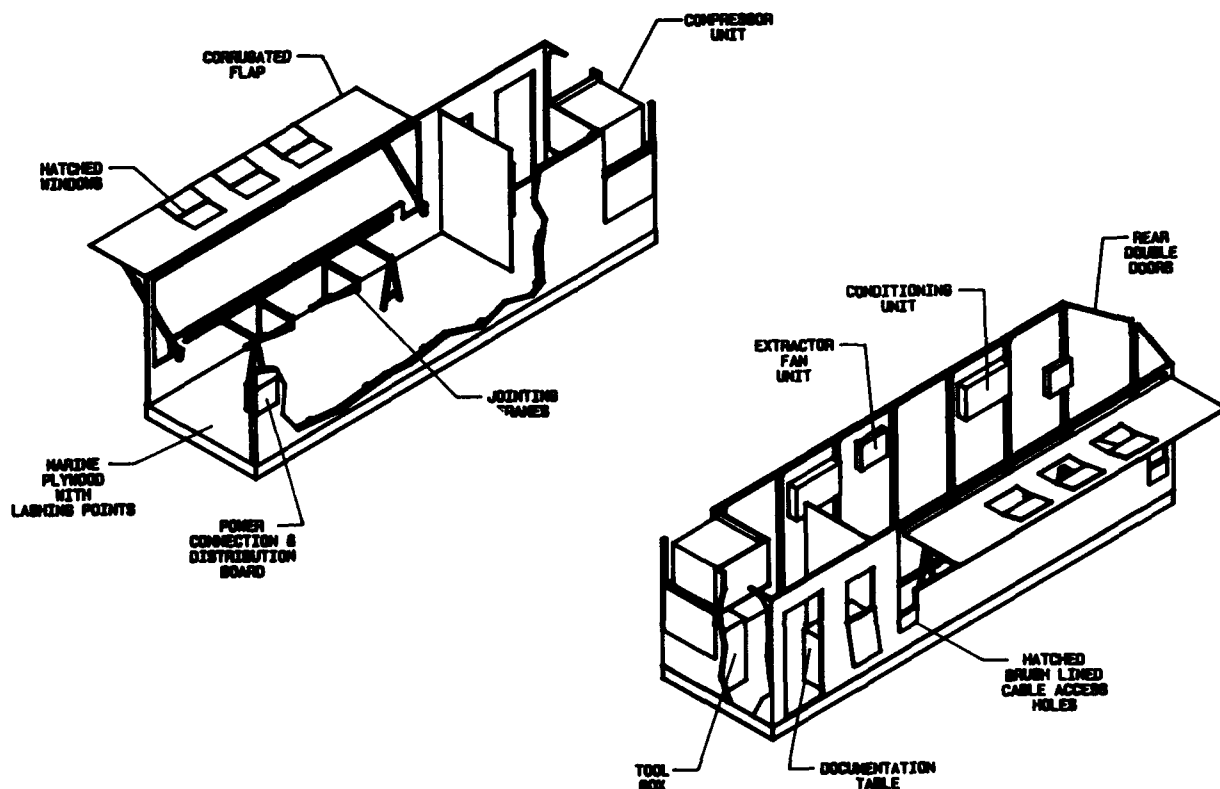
ISOMETRIC VIEWS OF JOINTING CONTAINER
